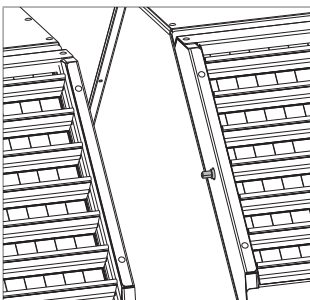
Connecting bolts for damper connection for partitioned exchangers
